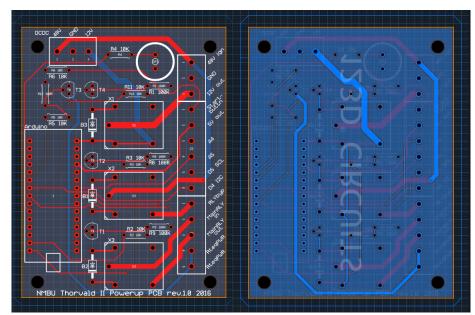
Illustration of the top and bottom layers of the PCB board. The horizontal and vertical traces are visible.
